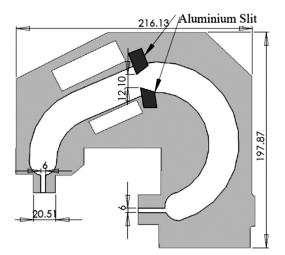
Cross sectional view of vacuum chamber with aluminum slit.
